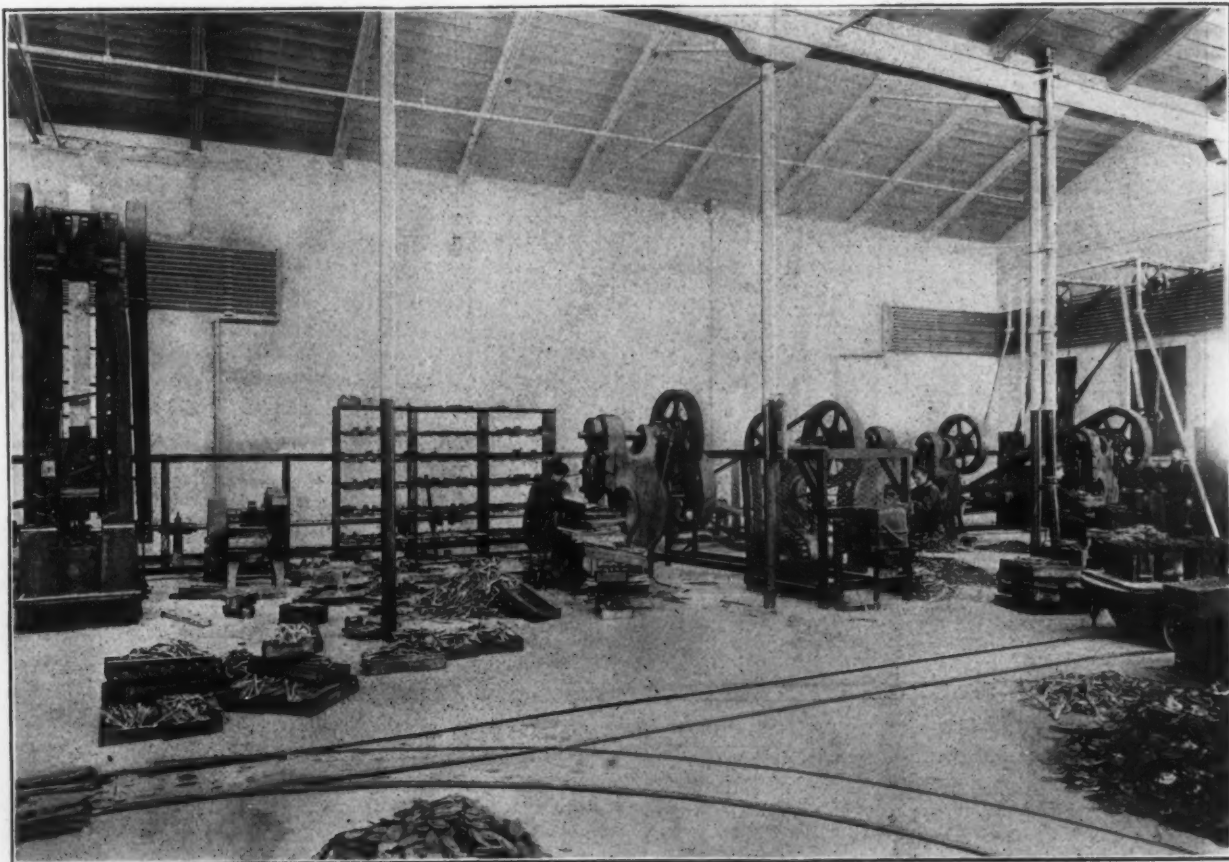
The Trimming Presses at the South End of the Machine Department.
